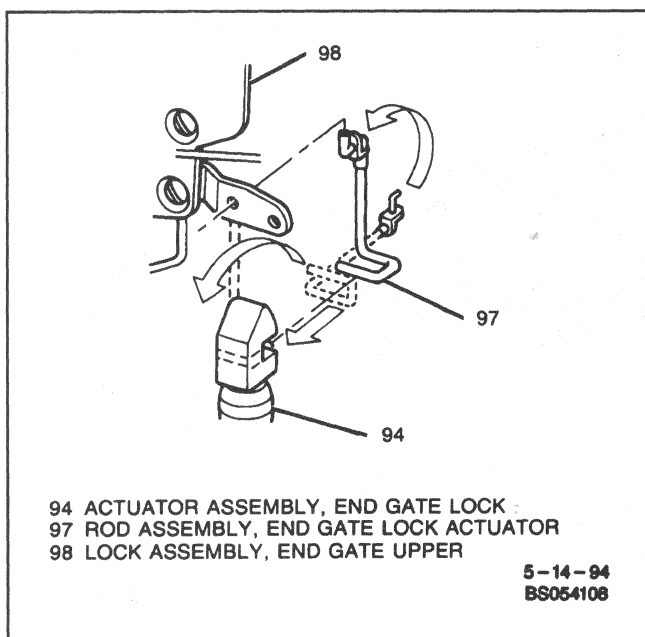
Installing Lock Actuator and Lock Actuator Rod
